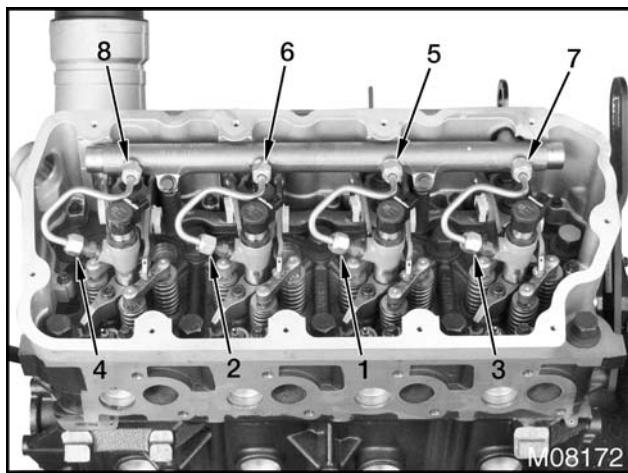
Fuel rail to injector tube assemblies tightening sequence (typical)
